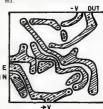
BOTTOM VIEW (Actus: 8126)
